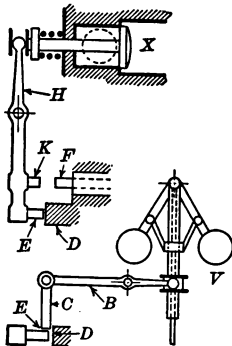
HIT-AND-MISS KEEPING EXHAUST VALVE OPEN
